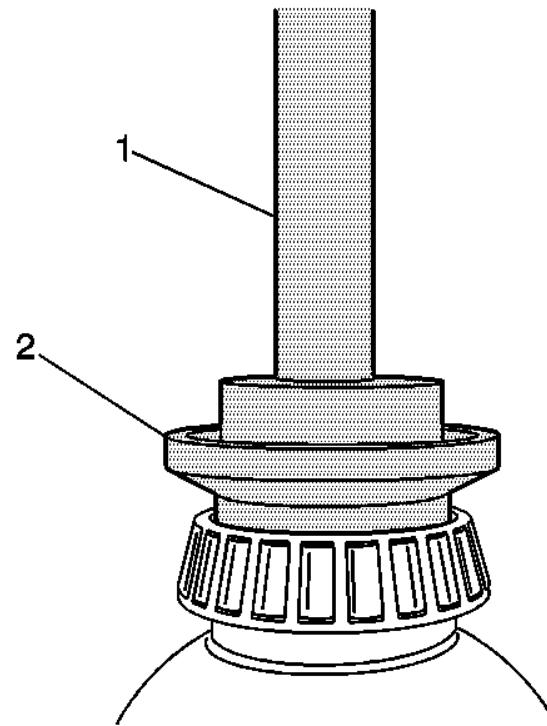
Installing Differential Side Bearings (11.5 Inch Axles)
